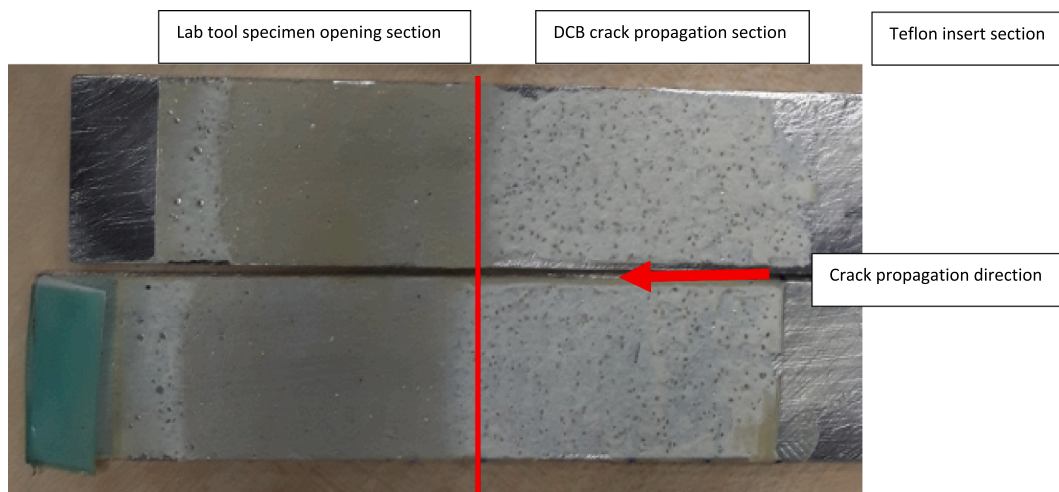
Cohesive fracture surface of specimen RWD_01. To the right of the red line the adhesive is fractured with the roller wedge, while to the left of the red line the specimen was fractured post-test by splitting the adherends completely with lab tools to be able to inspect the fracture surface (later not part of the test).
